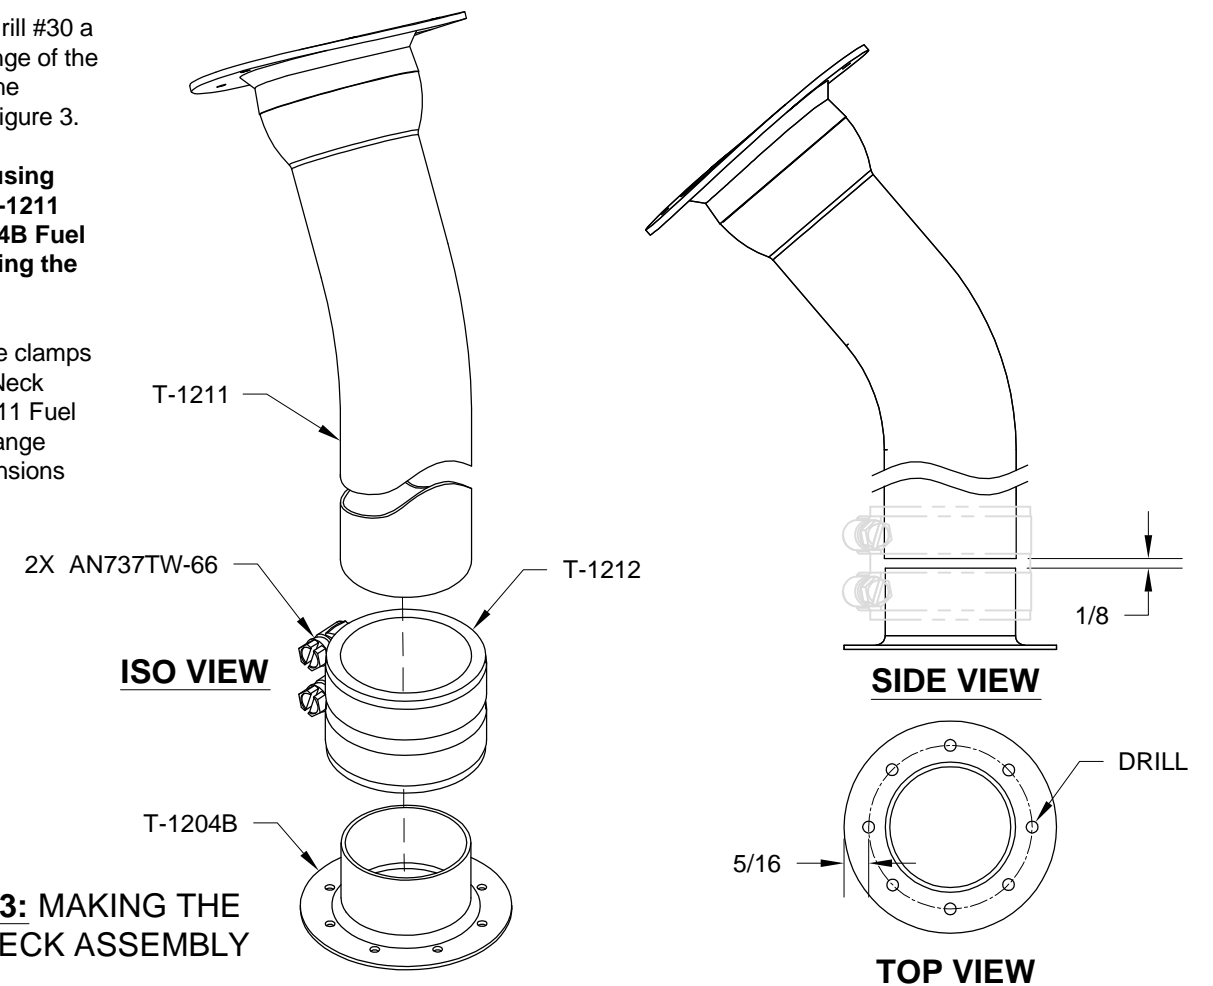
MAKING THE FILLER NECK ASSEMBLY
